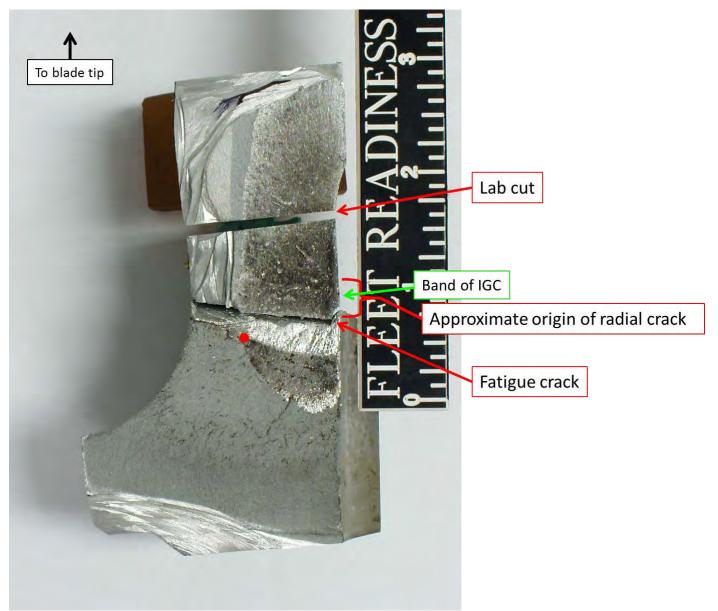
Intergranular radial crack fracture surface. Red dot indicates fatigue origin. Blade shank ID (taper and bushing bore surfaces) is on right.
